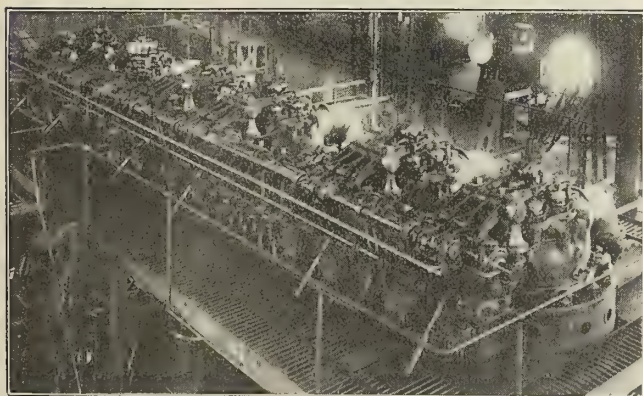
Complicated Mechanism on Cylinder Heads of European Reversible Diesel Engine
